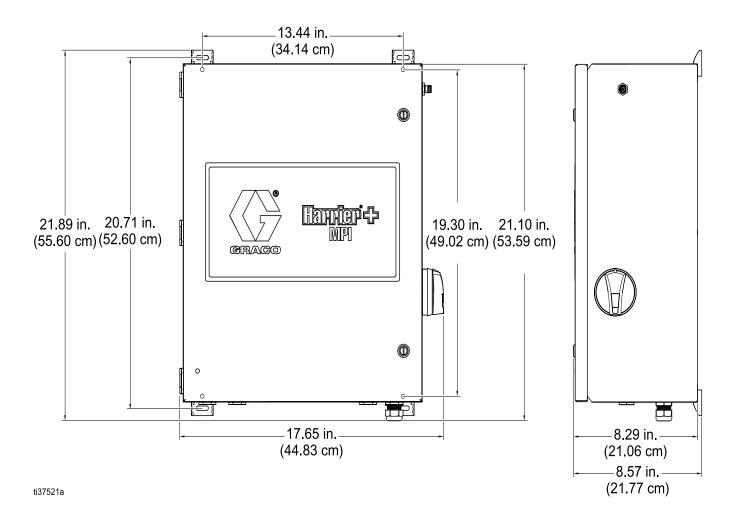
Multiple-Point Injection Control Box Dimensions and Mounting Hole Locations
